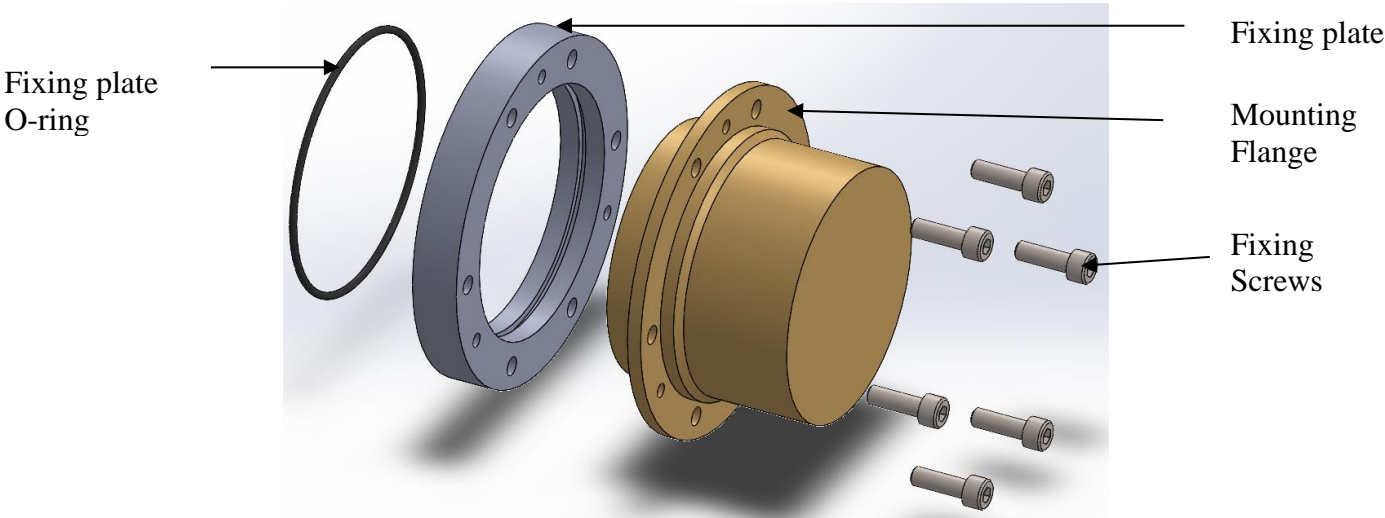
Exploded view of the assembled moisture sensor and fixing plate.
